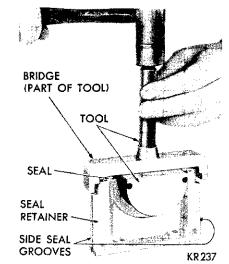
Installing Rear Main Bearing Lower Oil Seal
